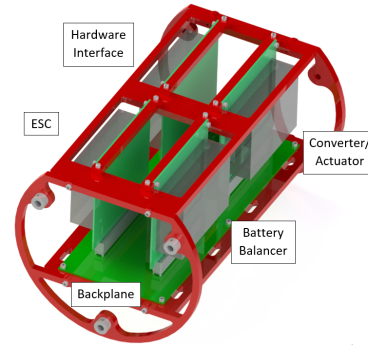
Labelled CAD rendering of Puddles’s PCB housing
